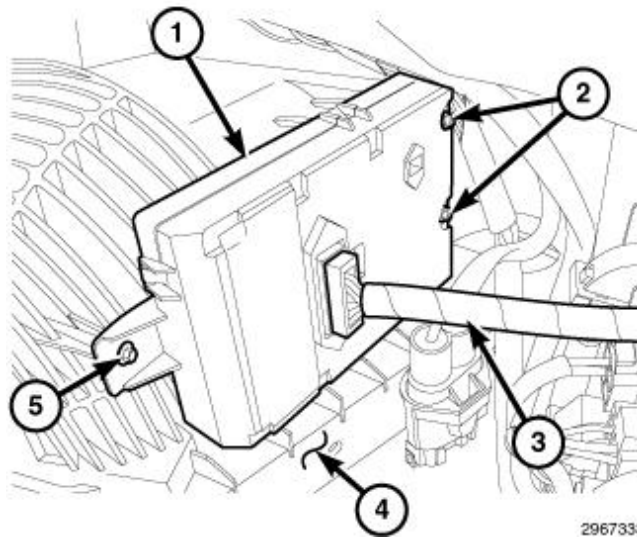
Wire Harness Connector, A/C Heater Module & Air Inlet Housing
